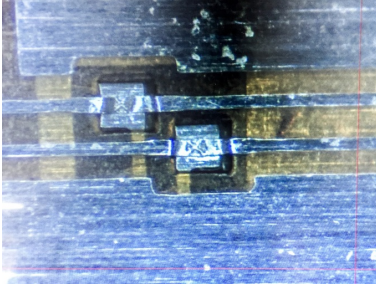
Photograph of two SpTAB bonds on a test flexprint produced by LTU Ltd [24].
